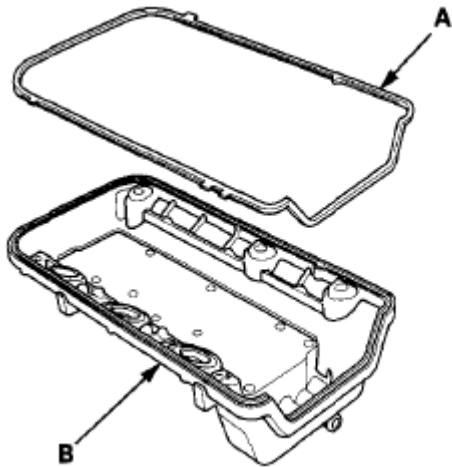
Installing Head Cover Gasket In Groove Of Cylinder Head Cover
